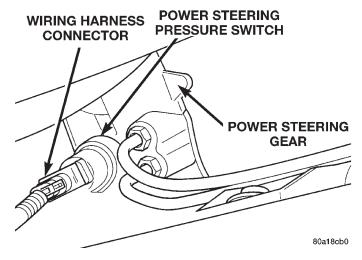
Power Steering Pressure Switch Location On Steering Gear
